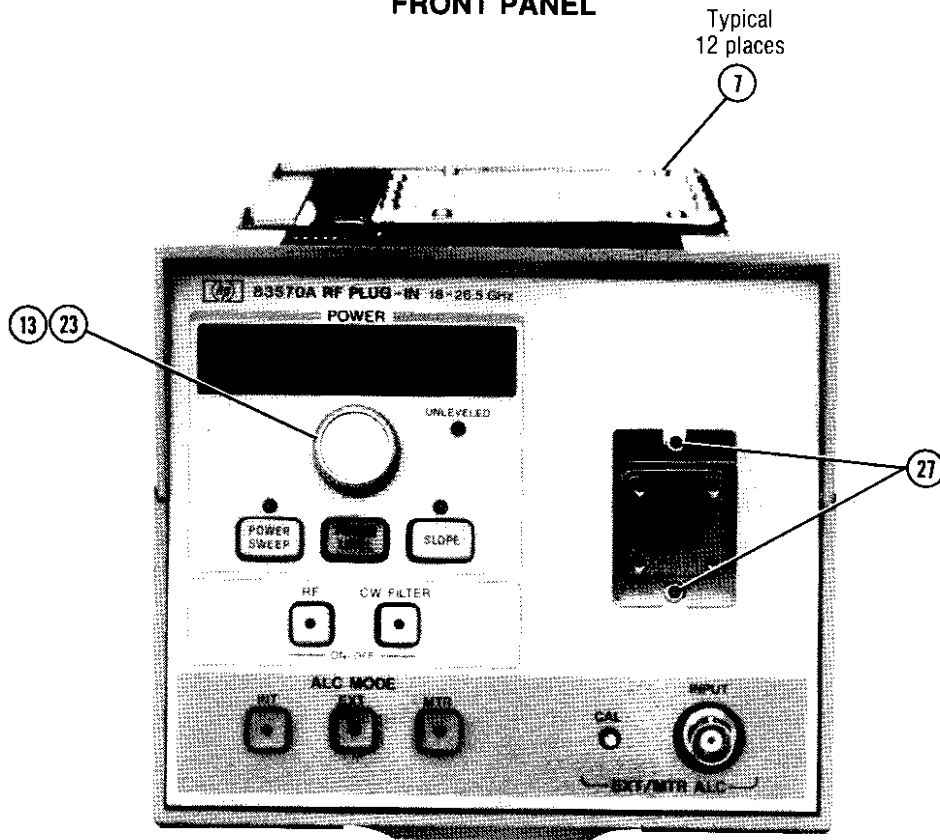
Chassis-Mounted Parts (2 of 3)
